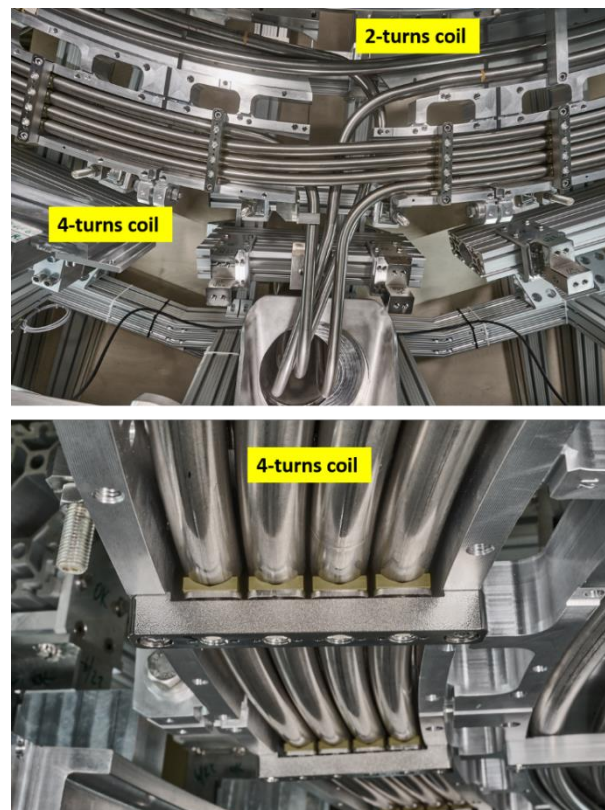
In-vessel coils bended in the AUG mechanical twin.
